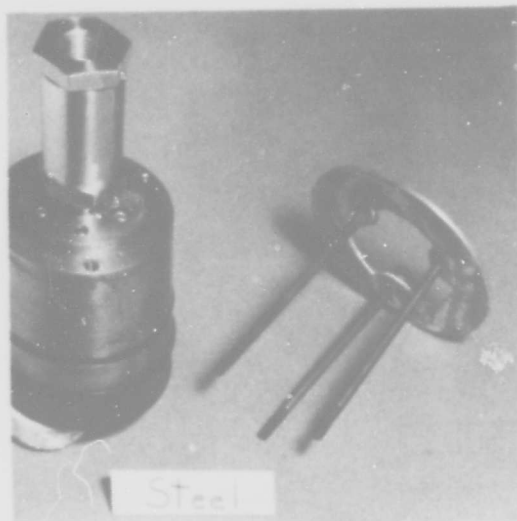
Carbon steel penetrator plug and pressure relief valve after exposure.
